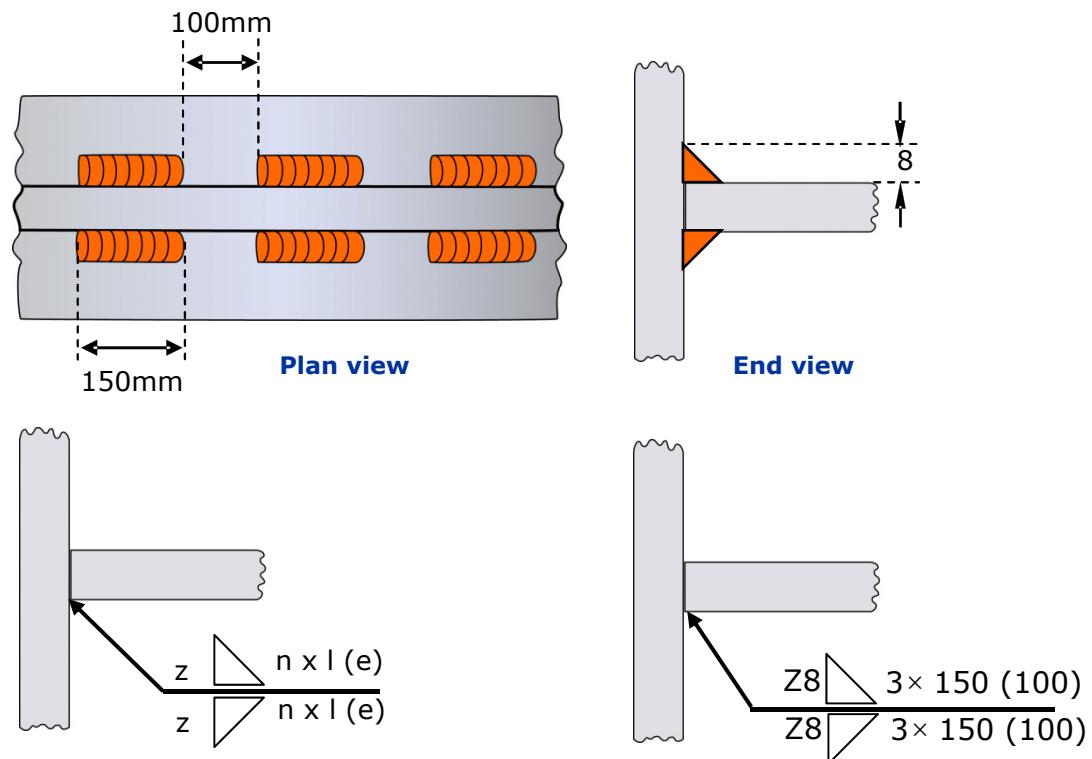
Examples of symbols for cross-section dimensions.
